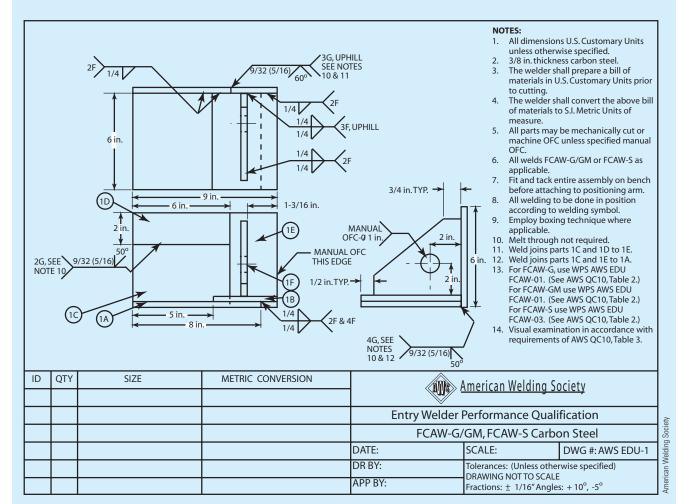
Practices 15-11 and 15-12 AWS SENSE Flux Cored Arc Welding FCAW-G and FCAW-S Workmanship sample for steel plate.
